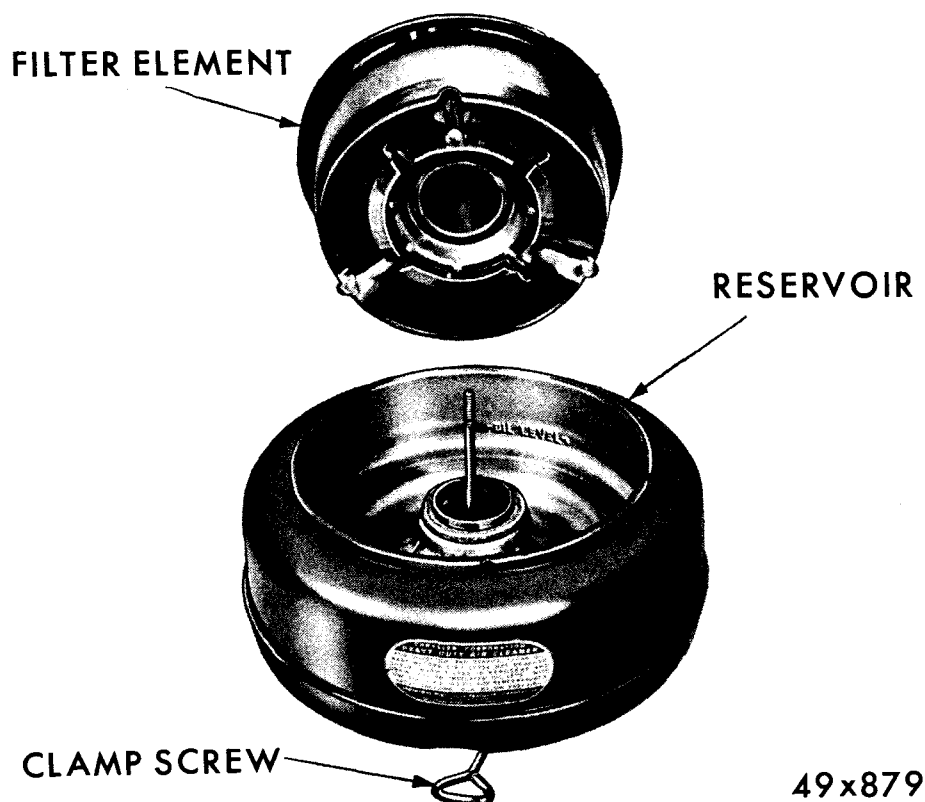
Carburetor Air Cleaner (Oil Bath Type)
